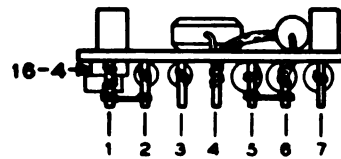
Radio Receiver and Transmitter BC-1267-A, 2d detector terminal board.
